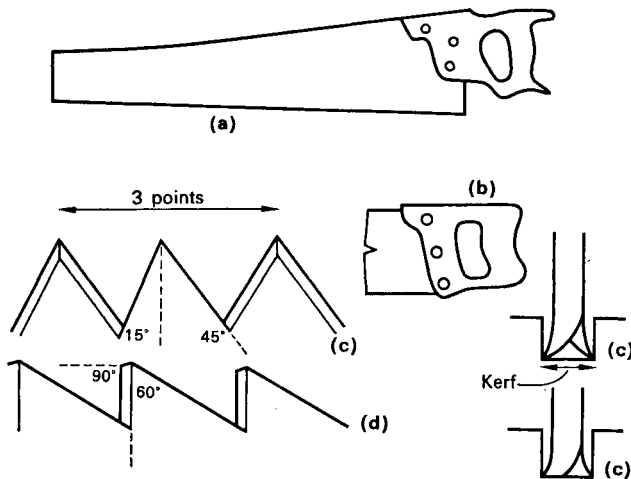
(a) Typical shape of hand saw which may be a rip saw or cross-cut saw. (b) A modern type of moulded plastic saw handle. (c) Detail of rip saw teeth and cutting action in making the kerf. (d) Detail of cross-cut saw teeth.
